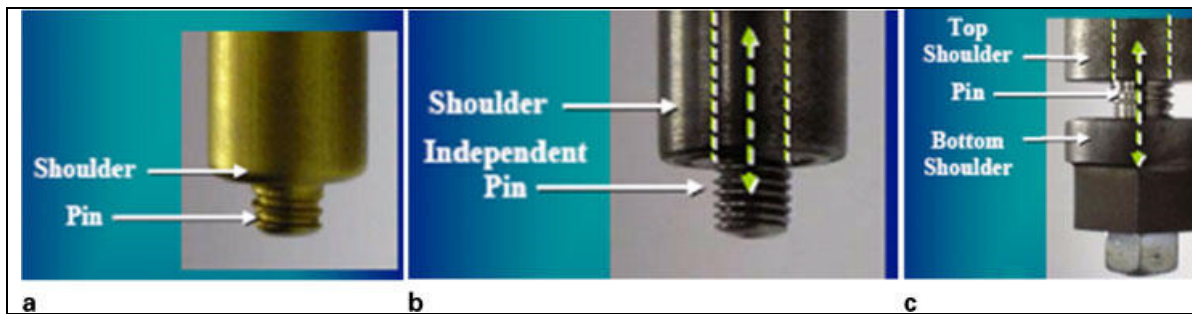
different types of FSW/P tools; a) fixed, b) adjustable and c) bobbin type tools (YN Zhang et al., 2012)
